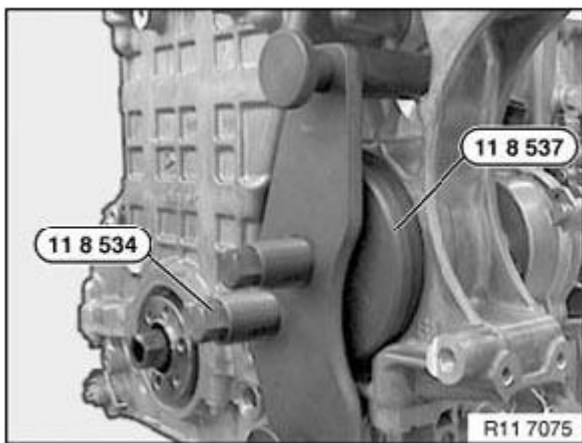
Identifying Special Tools 11 8 537 And 11 8 534
